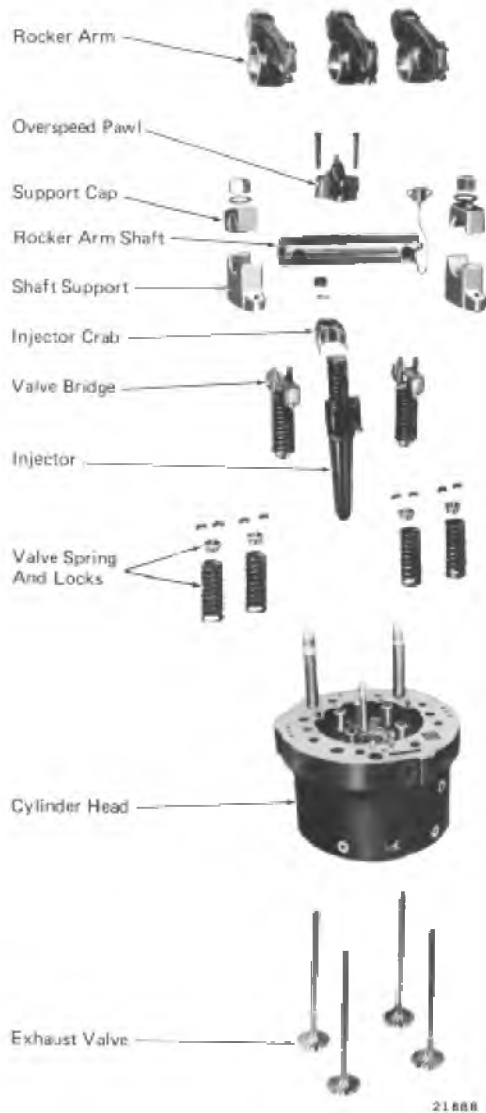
Complete Cylinder Head Assembly, Exploded View
